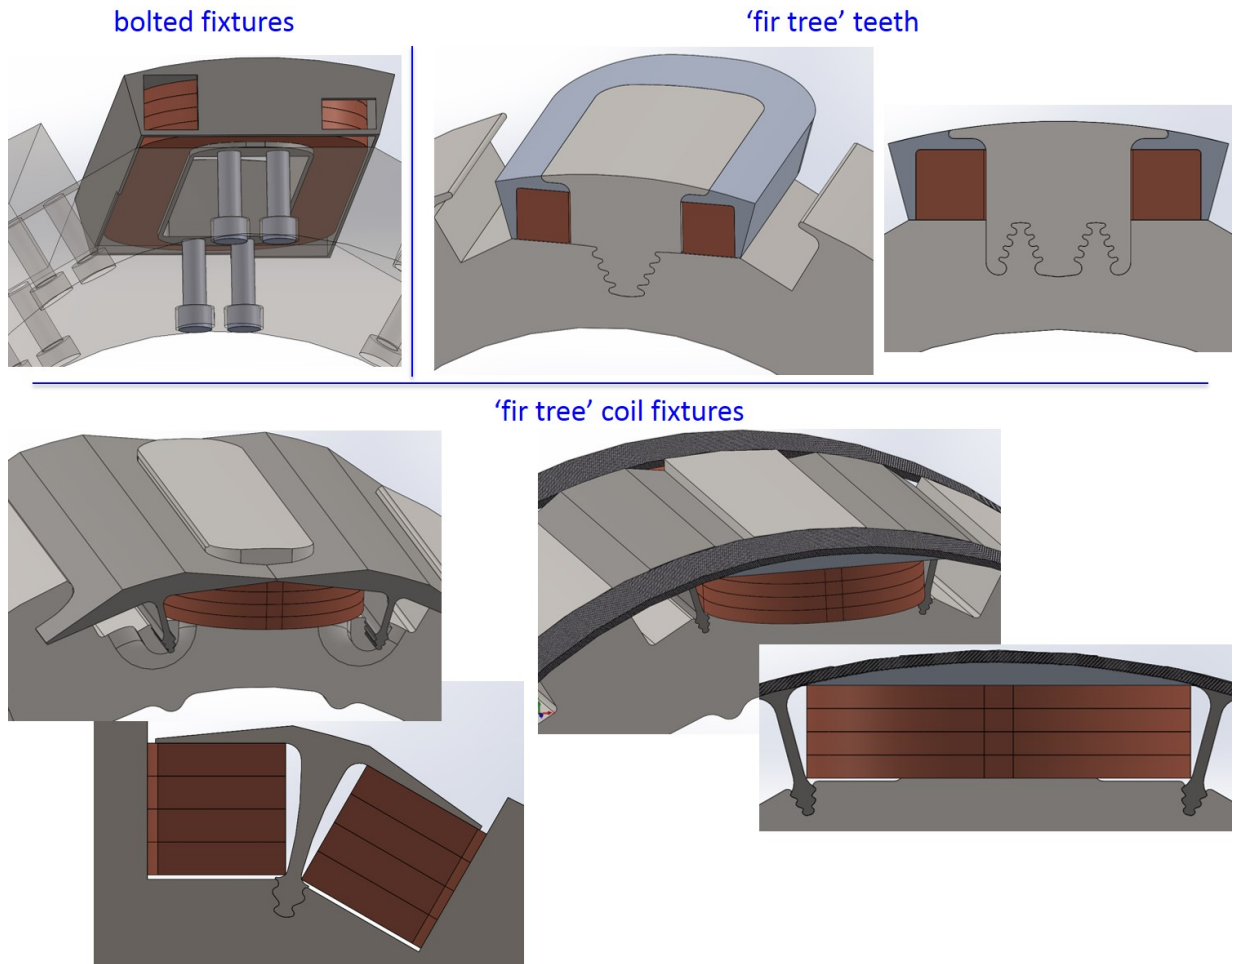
Candidate designs of the superconducting rotor that had negative stress margins.
